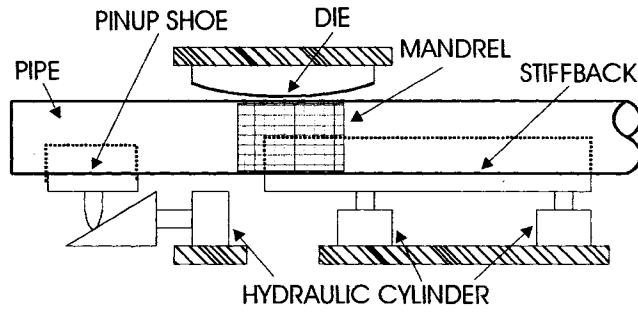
(a) - Mandrel inserted into pipe at bending location
